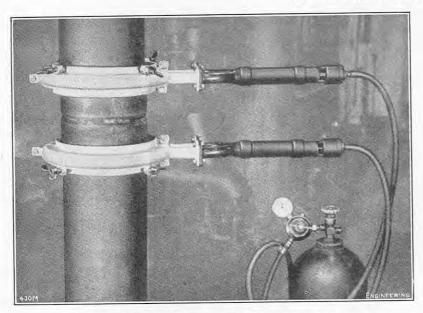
Electrical-Resistance Preheaters for Welds.
